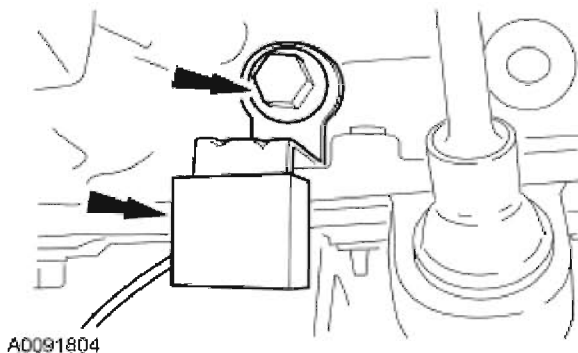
Locating Wiring Harness Retainers (1 Of 2)
